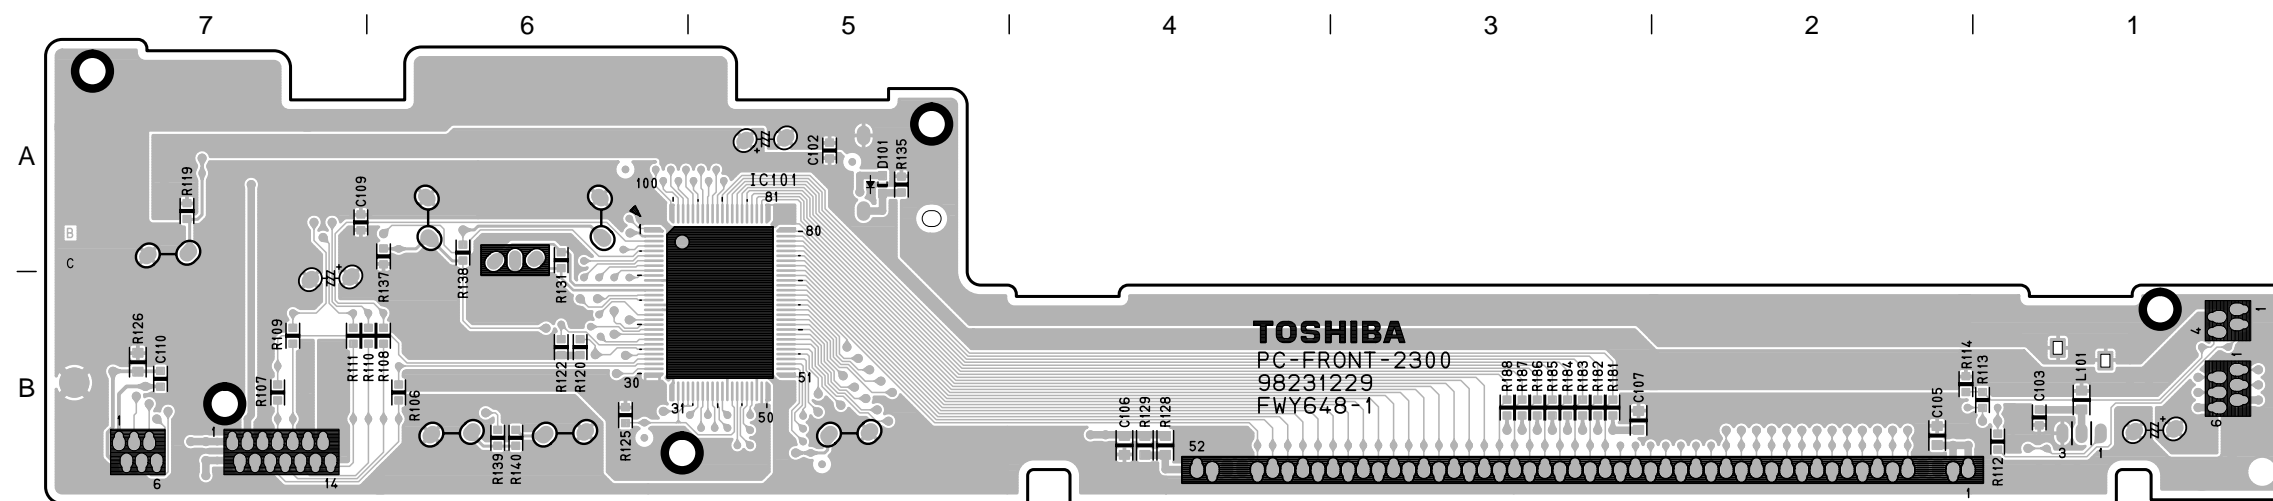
EU03 Front Display PC Board (Bottom Side)
